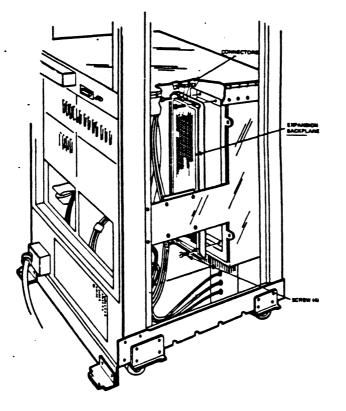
EXPANSION BACKPLANE MOUNTING
